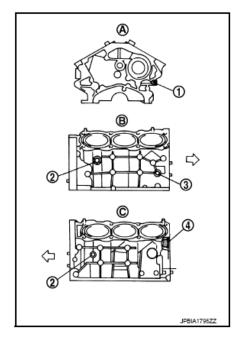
Identifying Water Drain Plug And Plug Courtesy of NISSAN NORTH AMERICA, INC.
